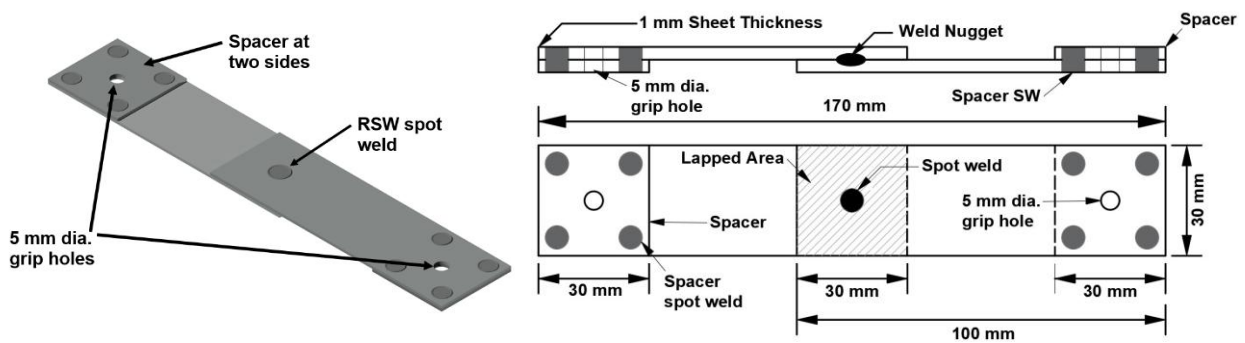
Sample geometry drawing: 3D in view (left) and 2D top view schematic drawing (right).
